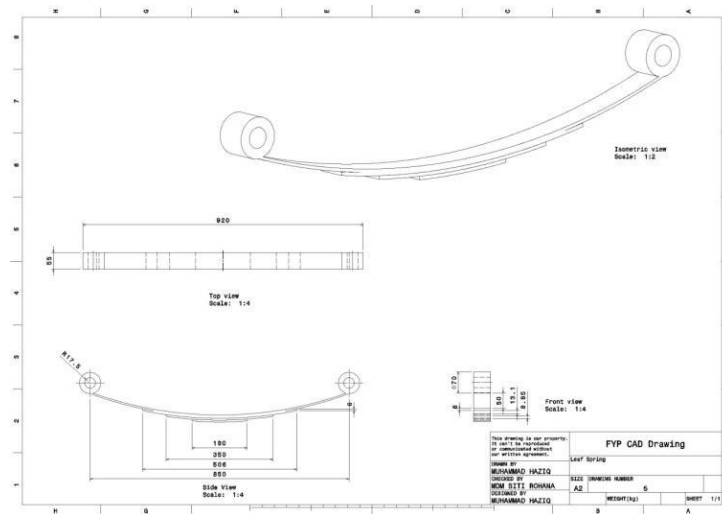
2D Isometric drawing with top, side, and front views of a leaf spring.
